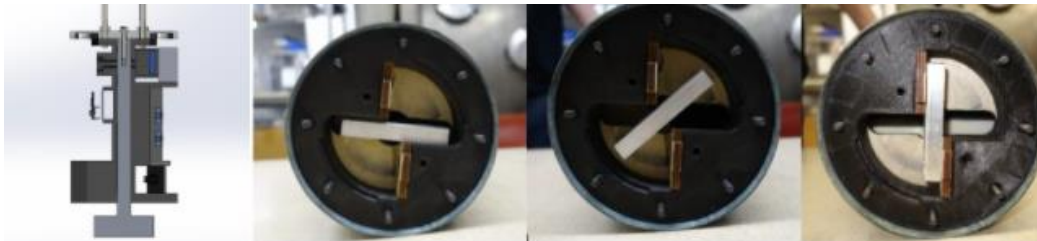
Avionics Bay Using Locking Mechanism. © WPI University Student Launch Initiative 2019-2020
